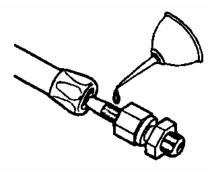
Low- and Medium-Pressure Hose Assembly Lubrication
